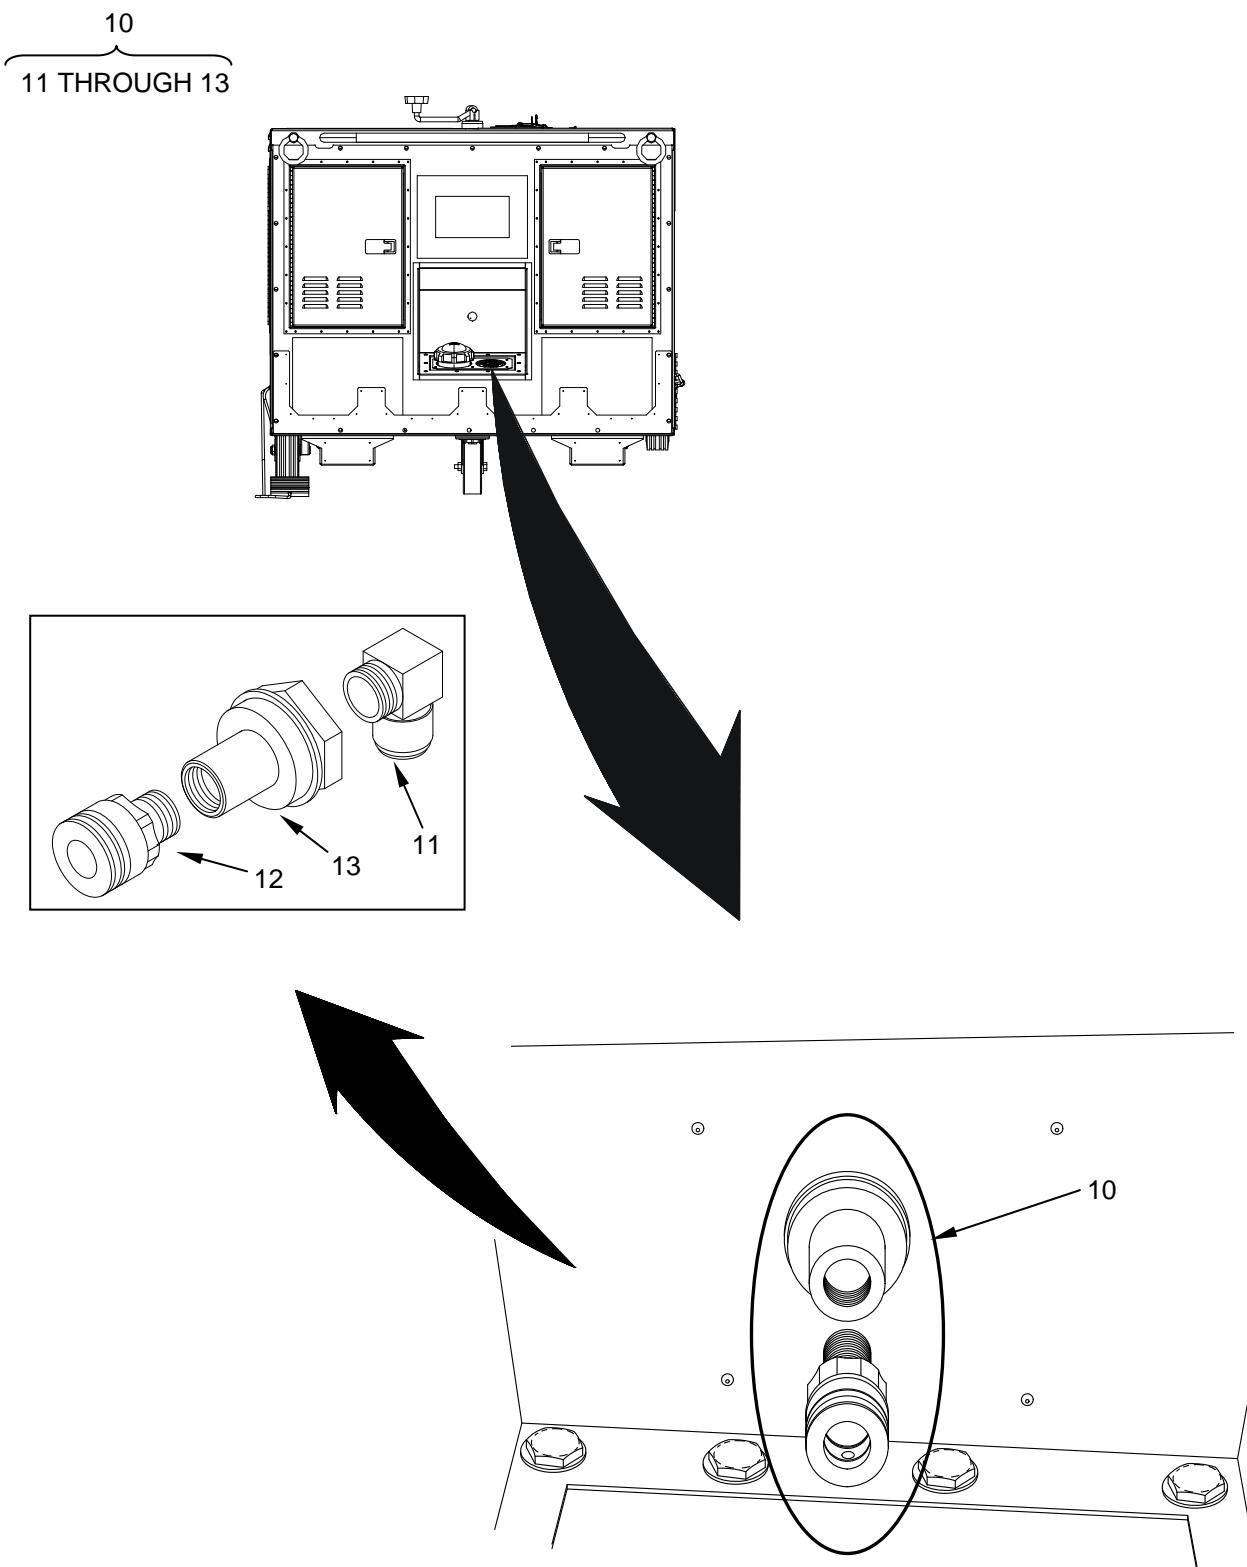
Fuel Tank Assembly (Sheet 3 of 5).
